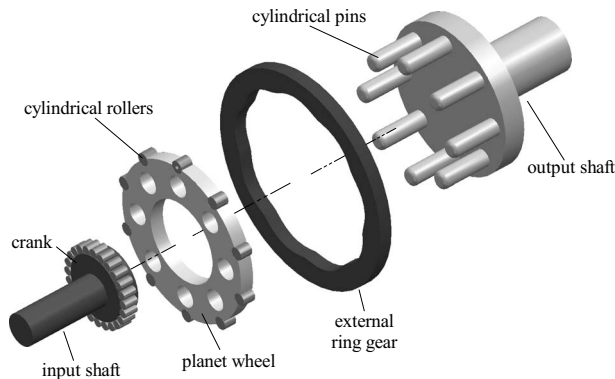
Exploded view of a cycloidal speed reducer with an external ring gear and cylindrical rollers mounted on the planet wheel
